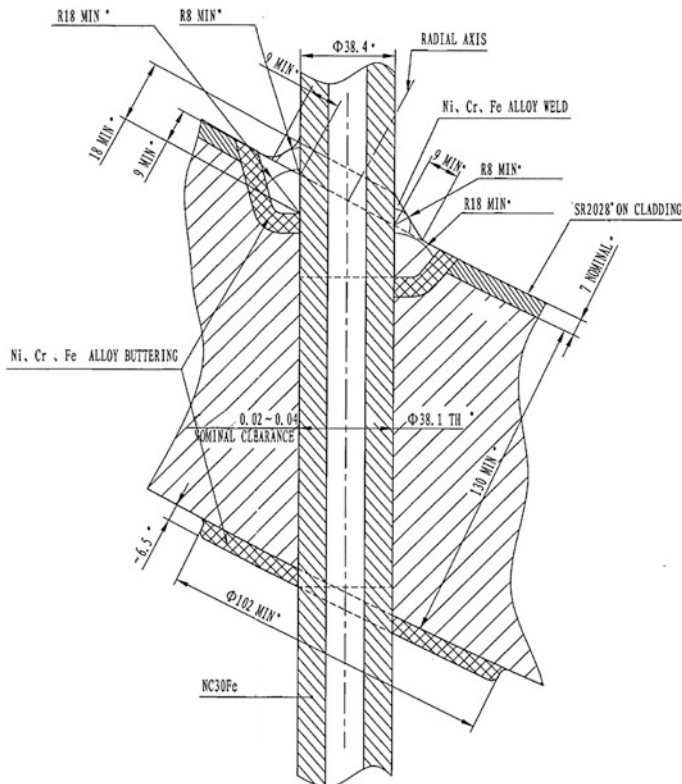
Typical view of welding of instrumentation tubes
